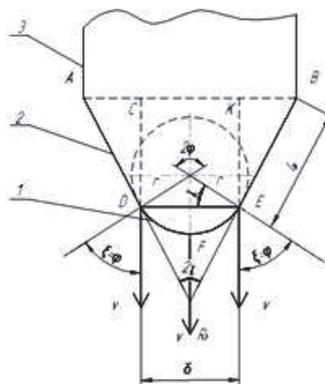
Elements of a loosening tooth: 1 - blade; 2 - chamfer; 3 - skeleton
